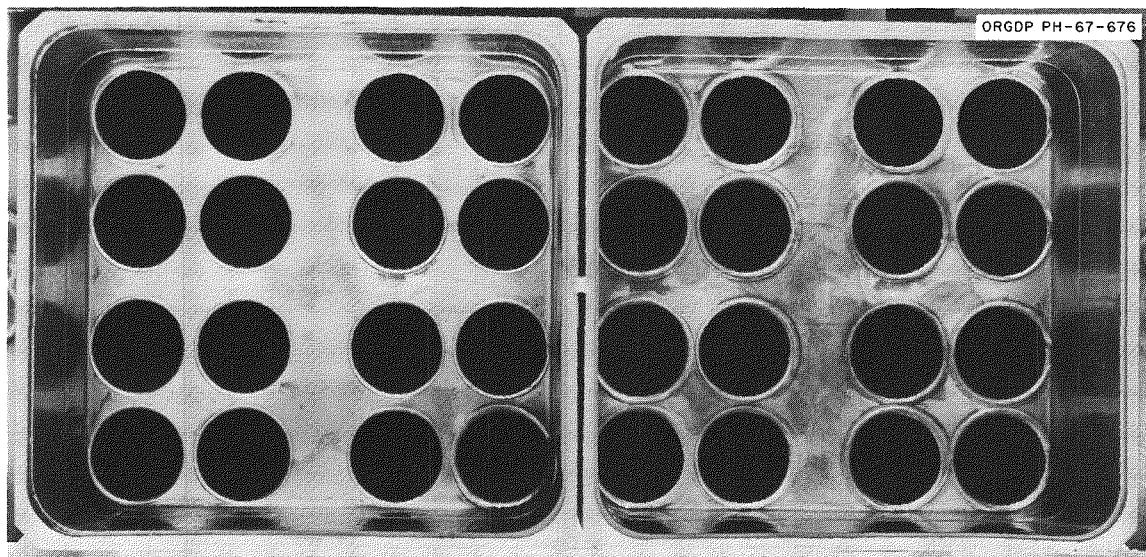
Underside of Lower Tube Sheet from Improved Pressure Shell Prototype, Showing Tube-to-Tube-Sheet Fusion Welds.
